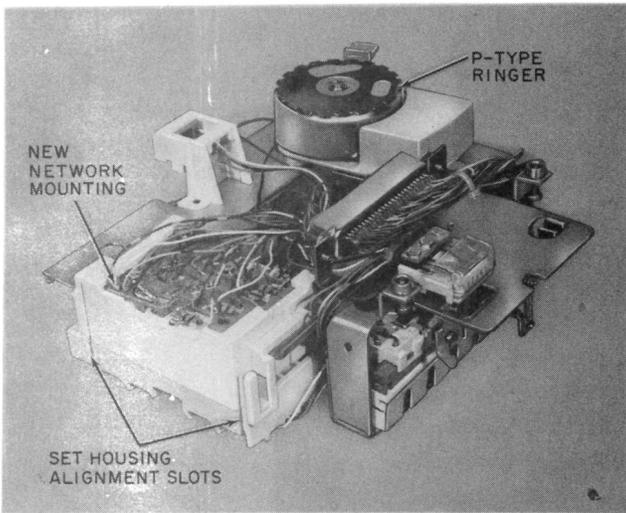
Rear of 2851-Type Telephone Set Hinged Chassis Assembly With New Network Mounting
